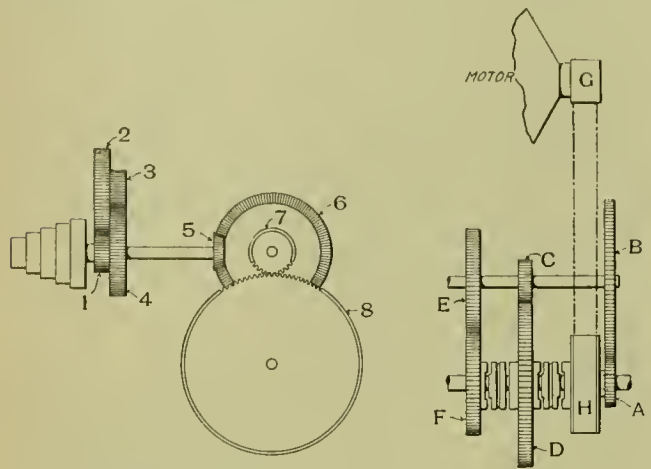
DIAGRAMS OF THE OLD AND NEW ARRANGEMENTS OF GEARING FOR THE DRIVE OF THE 72-INCH MILL, INDICATING THE CHANGES NECESSARY TO BE MADE.
